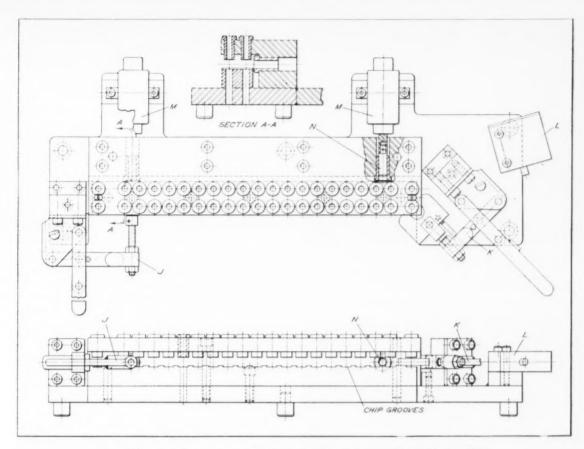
Ledge type drill jig features quick-acting clamps and pneumatic knock-out facilities.
